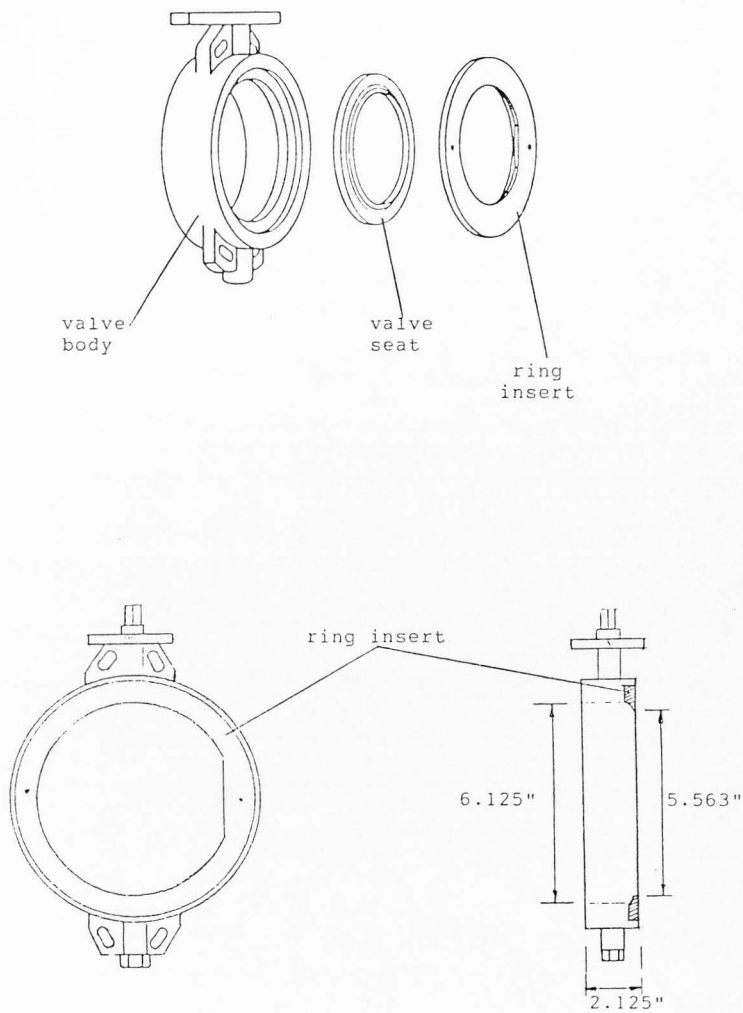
Diagram of test valve emphasizing the internal ring that reduces the flow.
